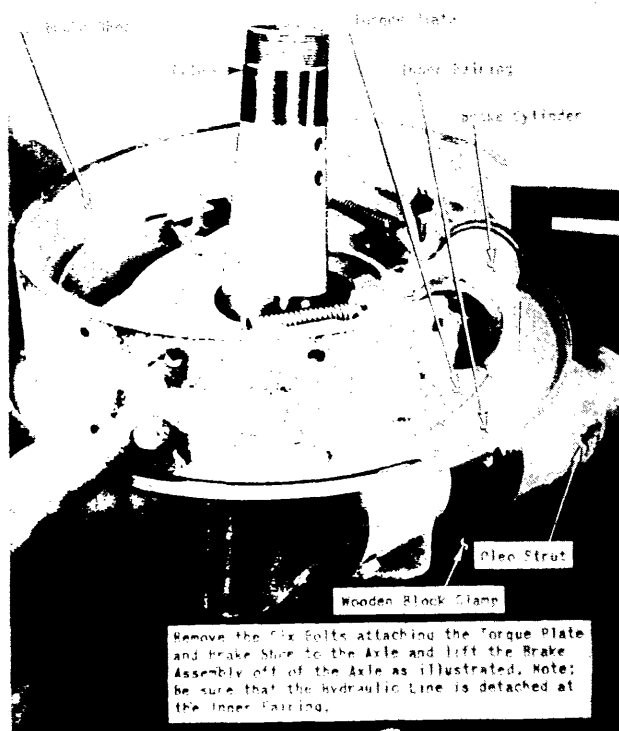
Removing Torque Plate and Brake Shoe from Axle
